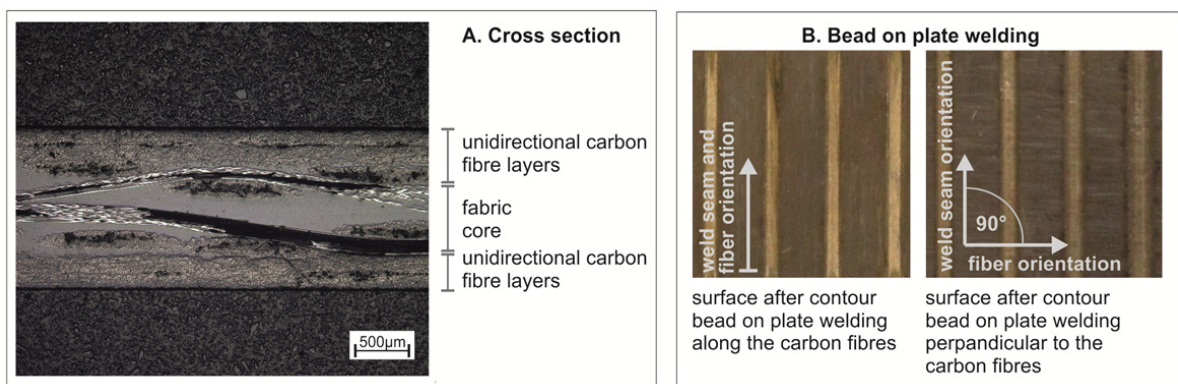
(a) build-up of the unidirectional CFRP of the conducted investigations; (b) bead on plate weld on unidirectional CFRP surface.
